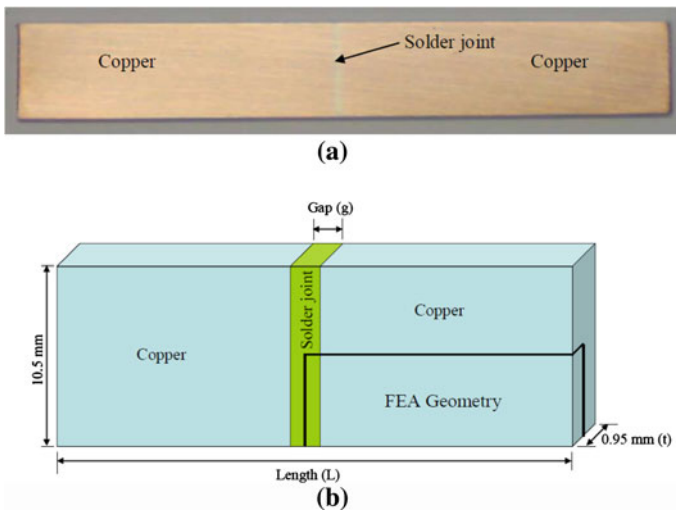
a Specimen with solder joint; b geometry of specimen with solder joint and its octant used in FE analysis (both gap and length can vary)
